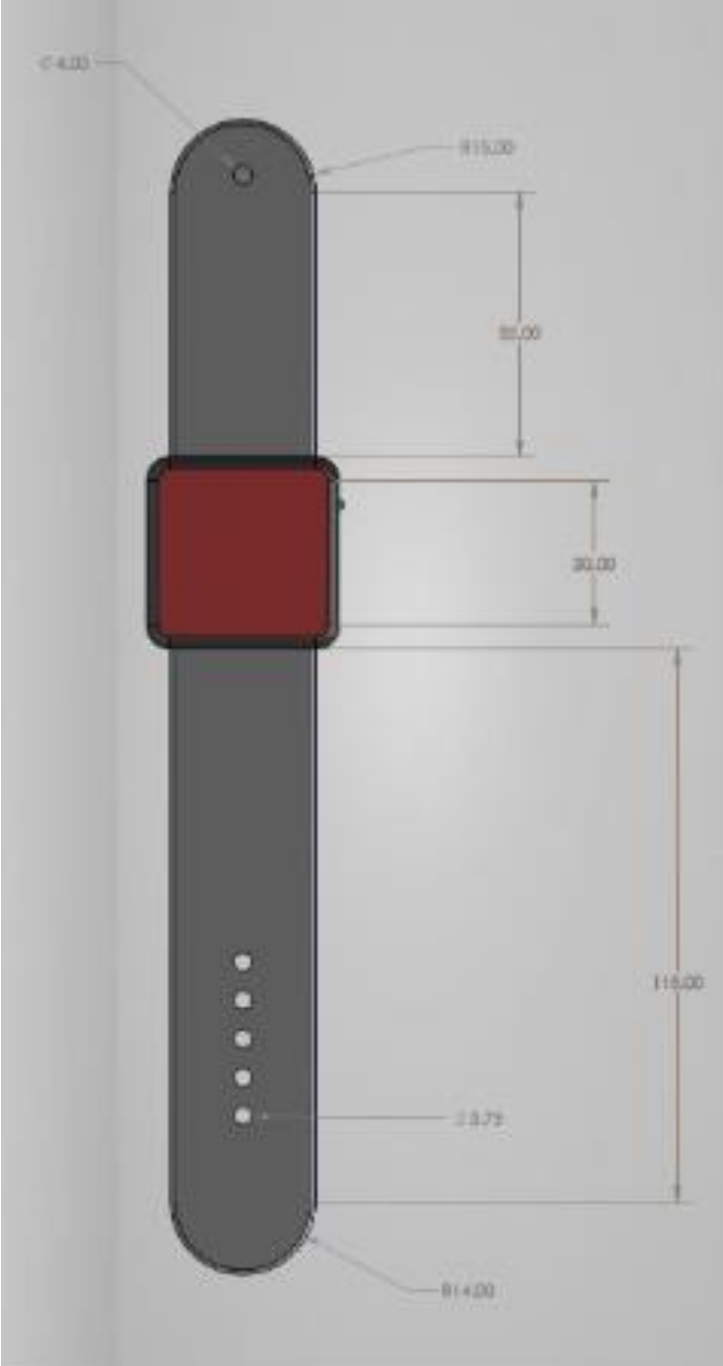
Top View of Proposed Final Design Drawings (All measurements in mm)
